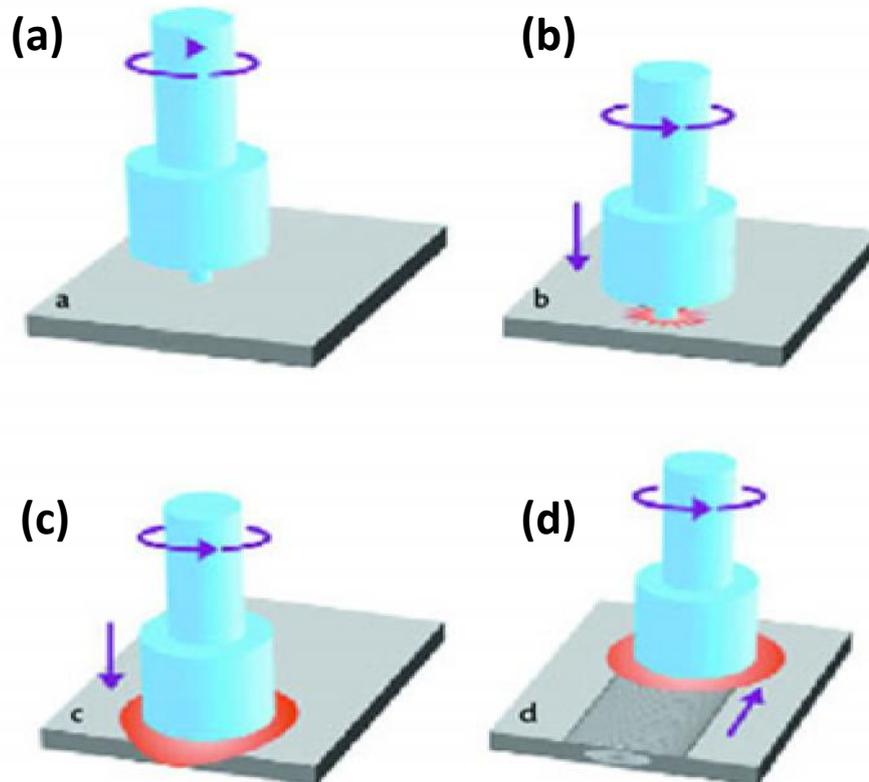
Schematic illustration of friction stir processing: (a) rotating tool prior to contact with the plate; (b) tool pin makes contact with the plate, creating heat; (c) shoulder makes contact, restricting further penetration while expanding the hot zone; and (d) plate moves relative to the rotating tool, creating a fully recrystallized, fine grain microstructure.
